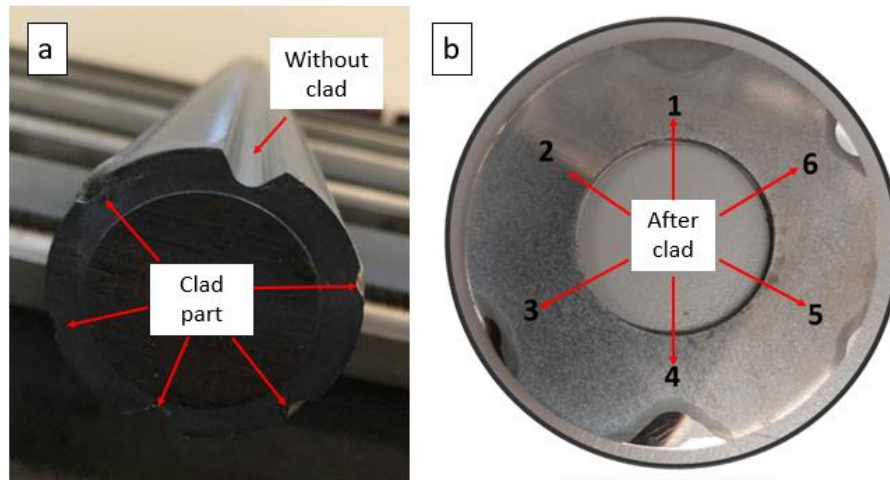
a) Repair bar before cladded all parts and sectioned; b) repair clad disc after etching to show clad parts
